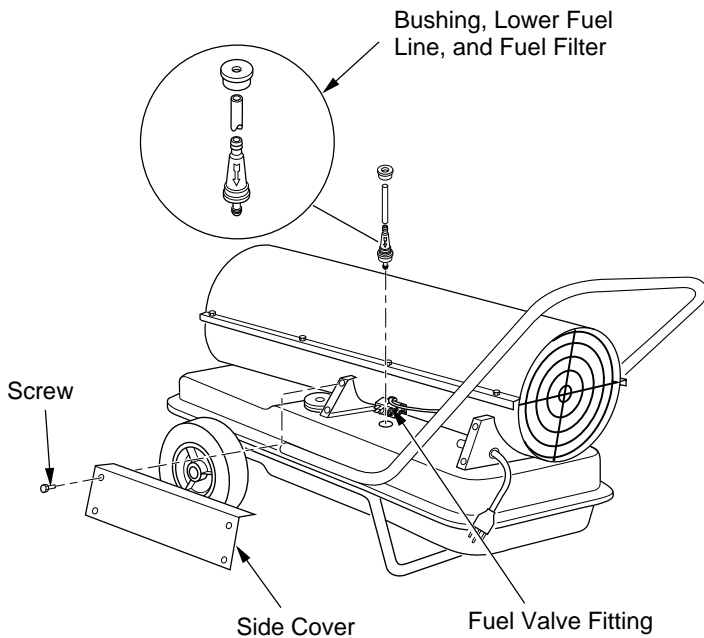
Fuel Filter Removal, 200 Model Only (Model with Fuel Valve Assembly Shown)
